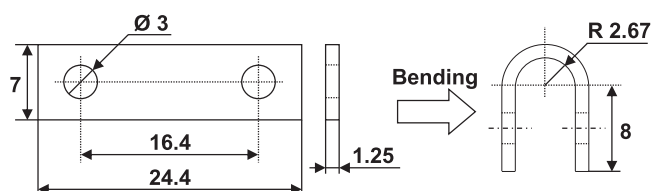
Dimensions of a U-bend specimen for the SCC tests (unit: mm).
